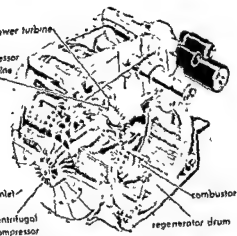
Cutaway view of General Motors GT-305 gas turbine engine, rated at 225 hp. Dry weight including all accessories is 590 lb.
